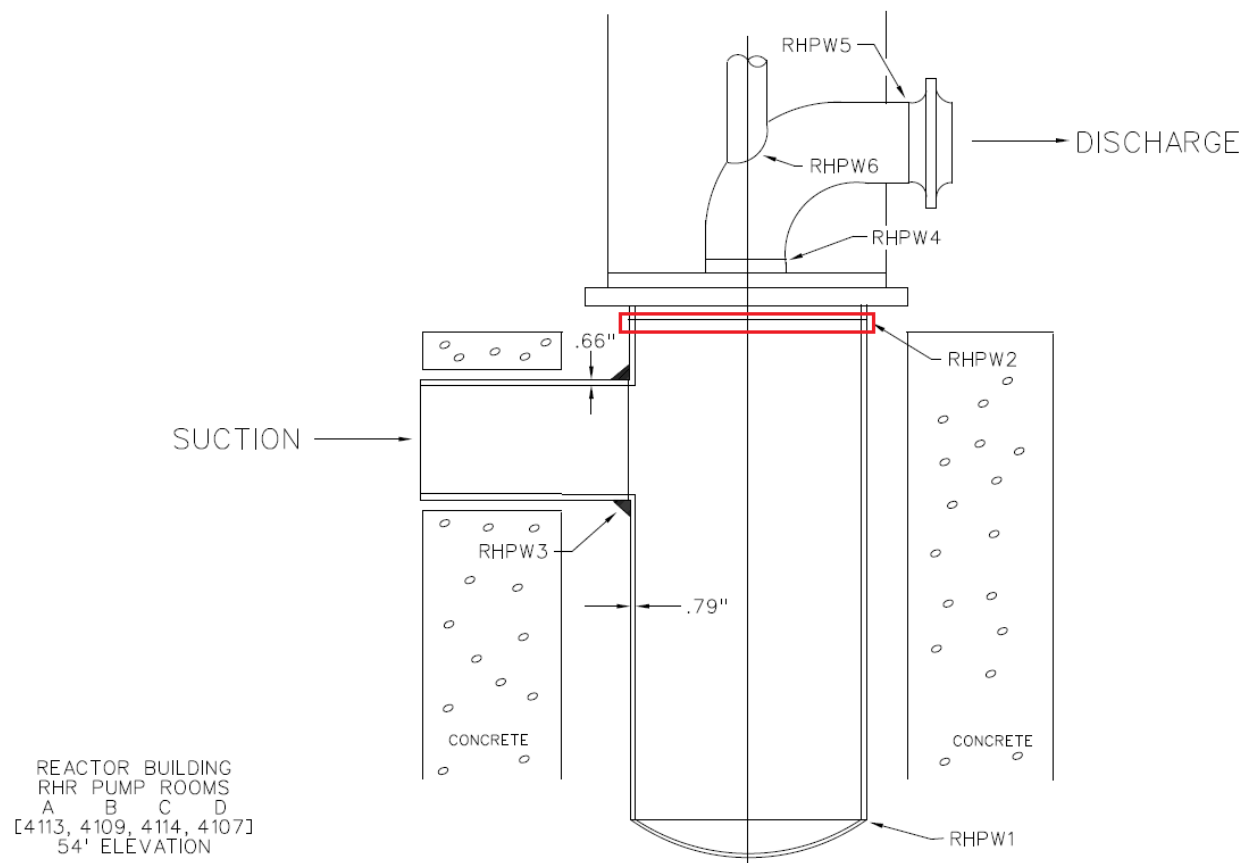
Weld 1-CP-202-RHP-W2 (Extracted from Reference DWG B-3)
